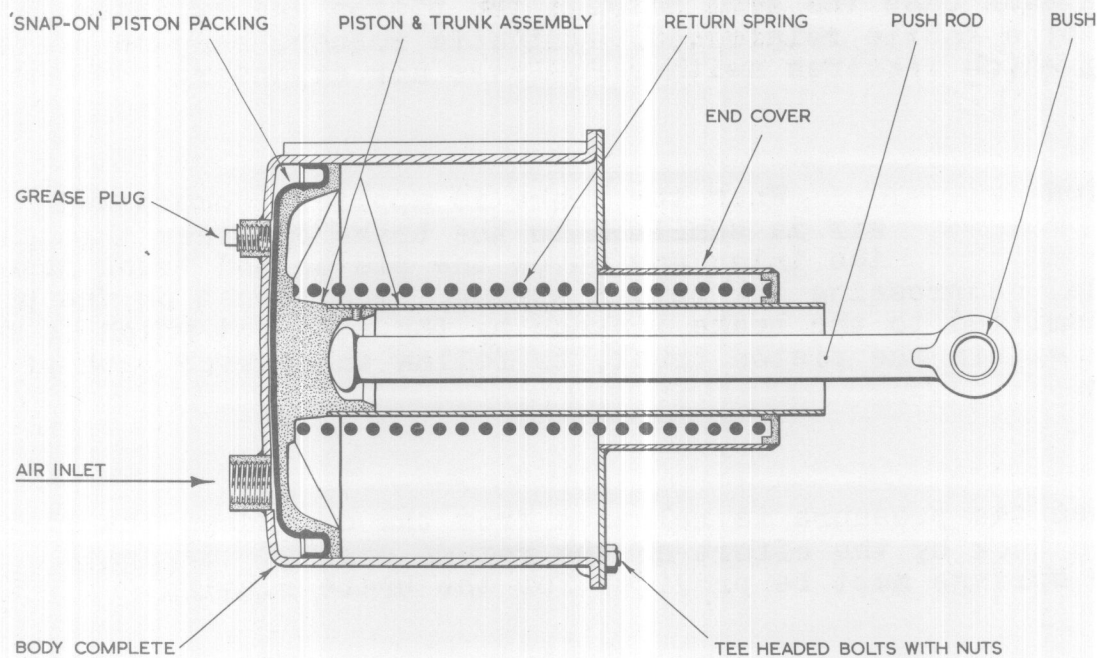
BRAKE CYLINDER TYPE 'J.P.'
